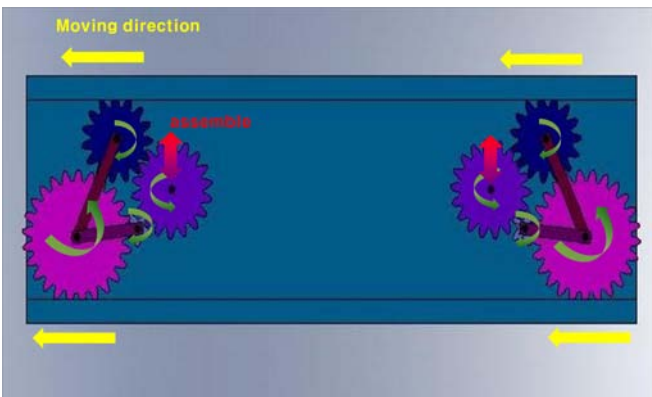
Slide Unit Mechanism, 4point contact mechanism.
